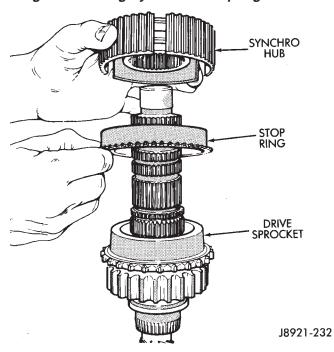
Drive Sprocket, Stop Ring And Synchro Hub Installation
